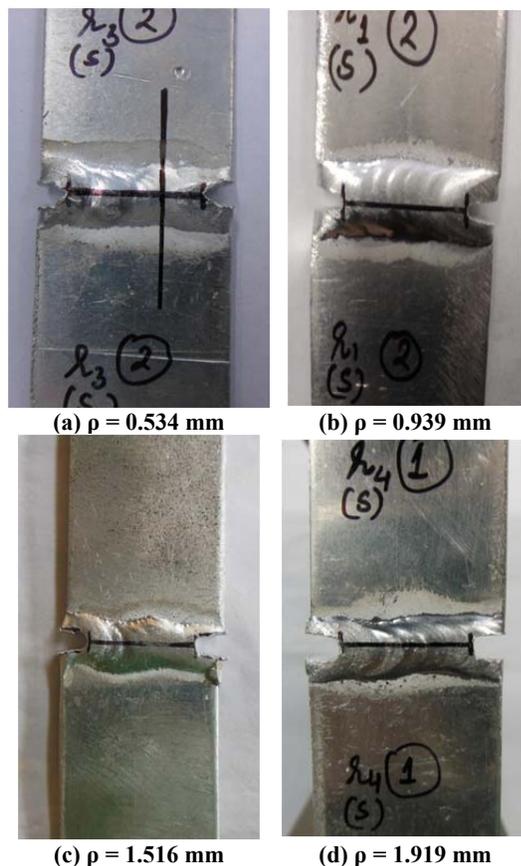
Images of Welded Double Edge Notched Tensile (DENT) specimens with different notch radius.
